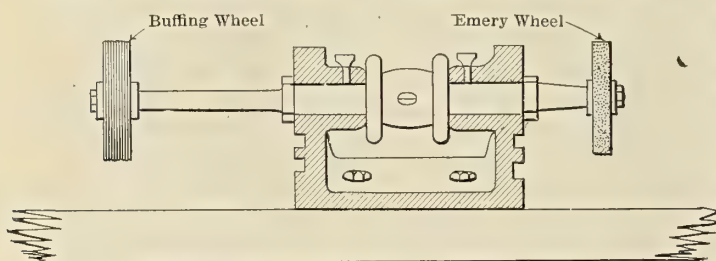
Handy Extra Emery and Buffing Wheel Made from Old Motor Boat Engine Piston
